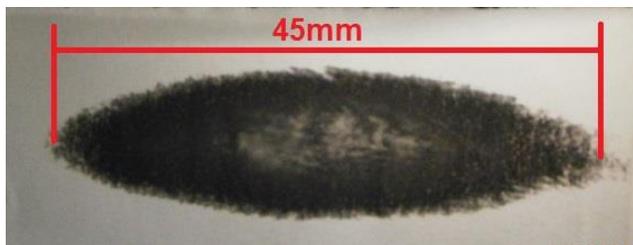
Laser beam geometry (tube $\varnothing 75 \times 3.2$)
